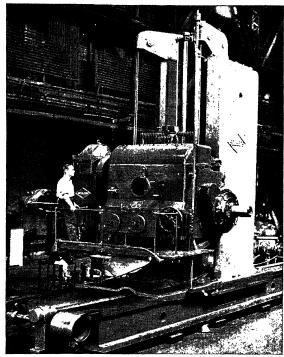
A machine that does horizontal boring, drilling, and milling. The entire carriage moves on rails. (Sellers.)
